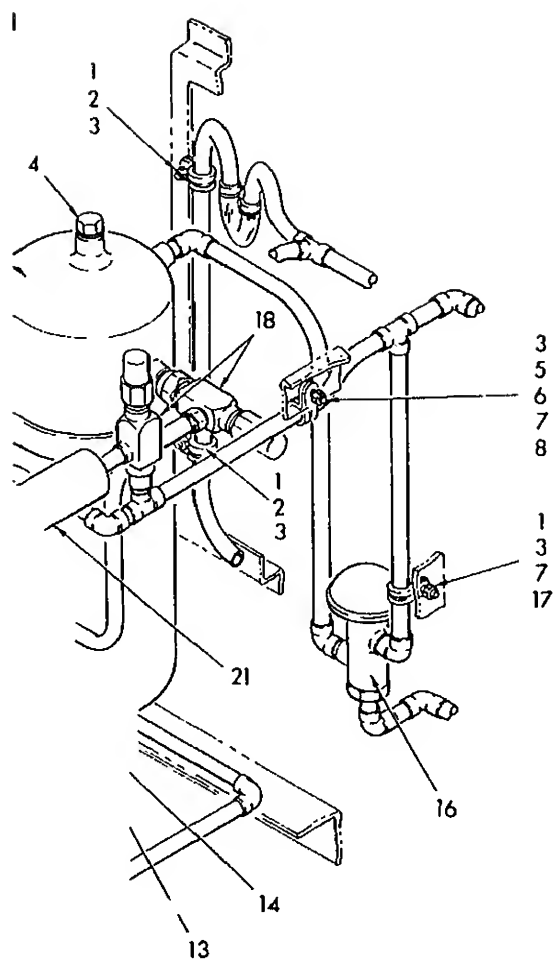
CONDENSER FAN AND MOTOR SECTION (SHEET 2 OF 2)
